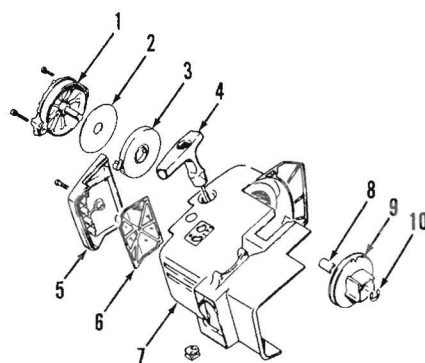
Exploded view of rewind starter assembly used on Models 015AV and 015AVE.
